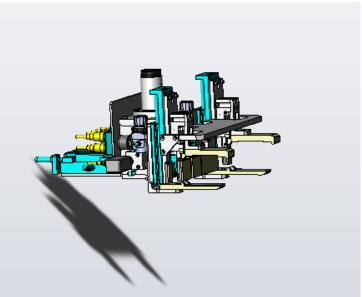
An illustration of the Cell Stacking Robot end of arm tooling.
